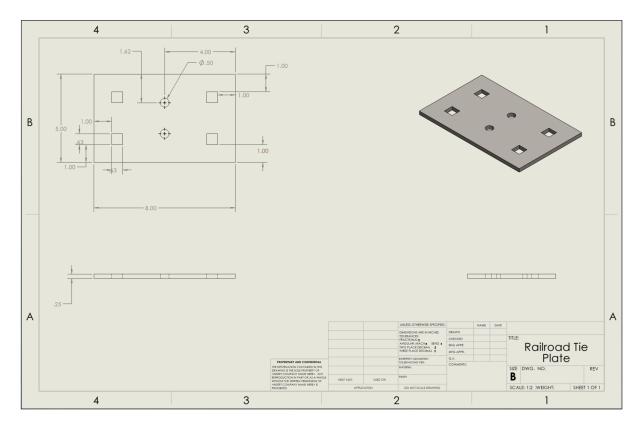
DRAFT DRAWING OF RAIL TIE PLATE MOUNT.
